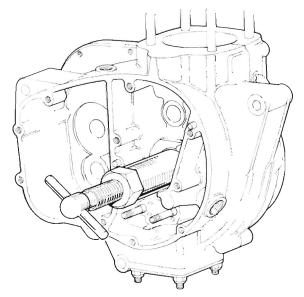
Reassembling crankcases using Service Tool No. Z167
